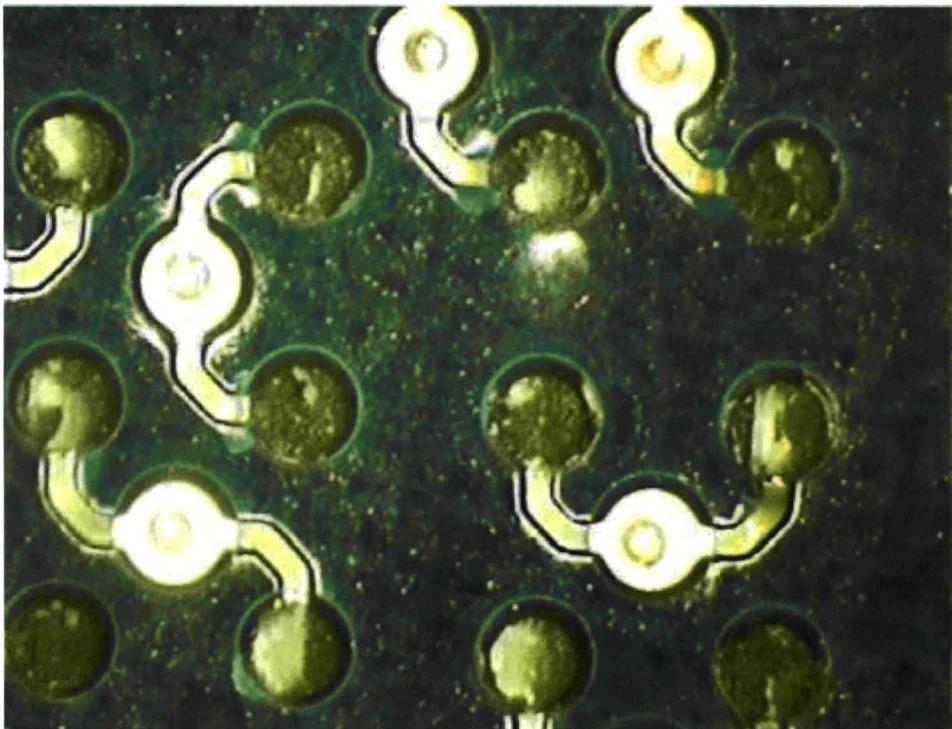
Test Vehicle 30 BGA U4 with Missing Pads (SnPb Solder/SnPb Balls)
